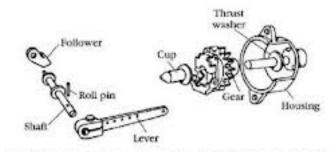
The governor mechanism used for 60000, 80000, and 140000 engines. The housing, accessed from outside of the engine, is unique to this engine family, all other centrifugal governors live inside of the crankcase. The pinch bolt that secures the lever and shaft is the main adjustment point for this and most other Briggs & Stratton governors and should not be disturbed during normal service activities, including engine overbund.
